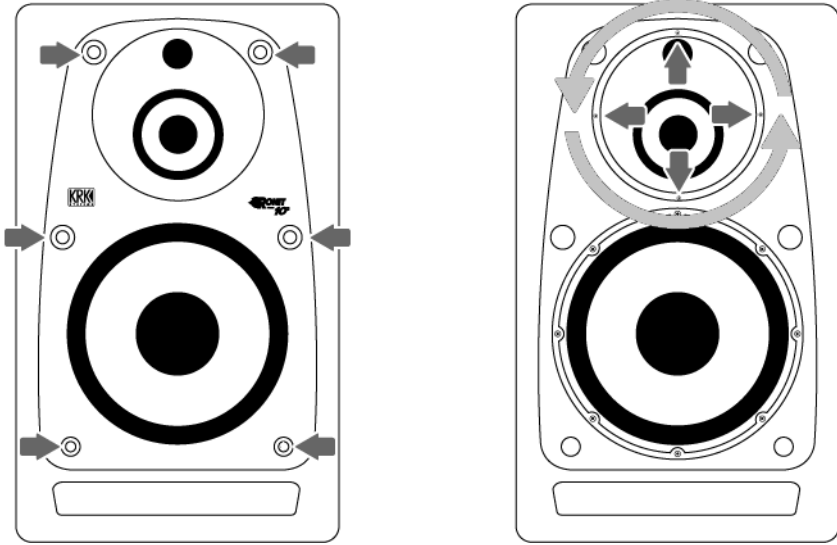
Figure I (Left): ➡ Arrow indicates hex-screw location on the front baffle.
